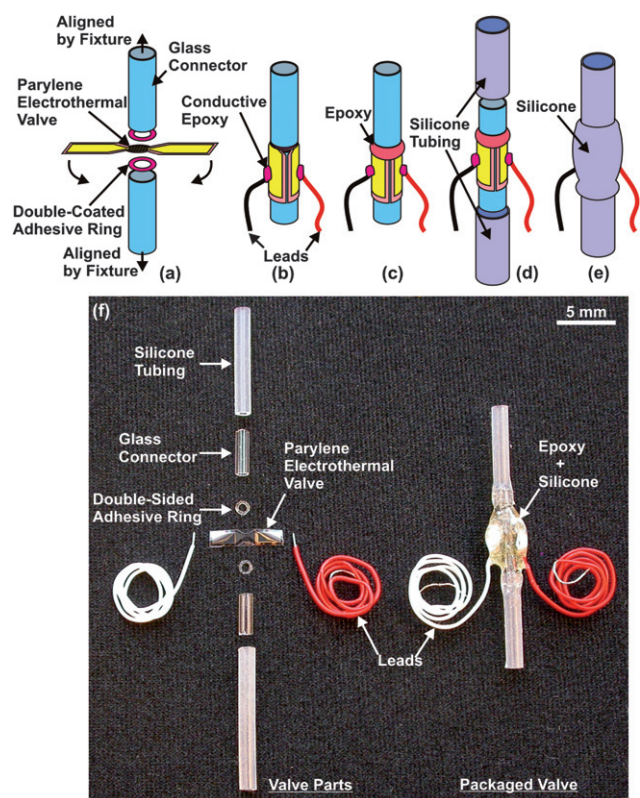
Illustrated assembly process for the Parylene electrothermal valve: (a) exploded view of components, (b) sandwiched valve with electrical leads, (c) epoxy encapsulation, (d) addition of silicone tubing for connection to drug pump, and (e) silicone encapsulation of entire valve assembly. Photograph (f) showing components for the valve (left) and a packaged valve with silicone tubing (right).
